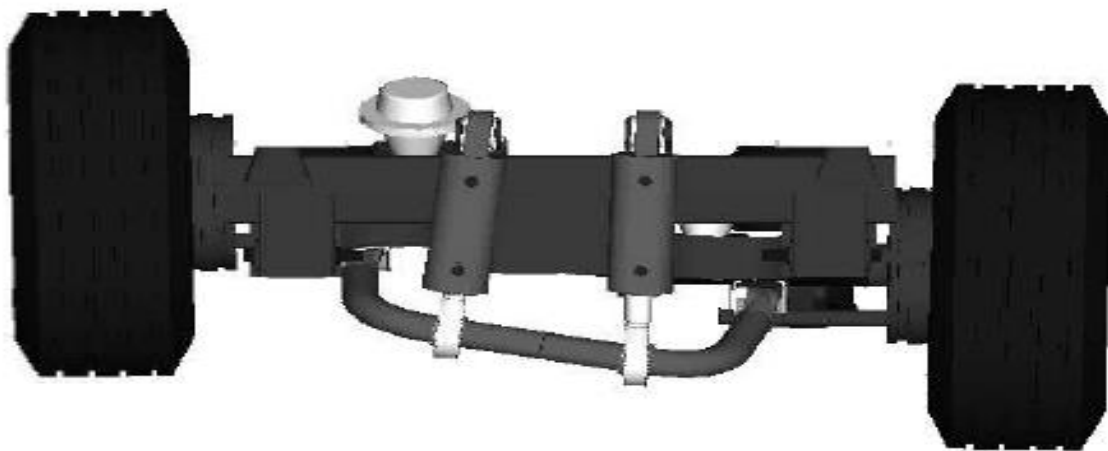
Hydraulic Actuators & ARB Assembly in Active Roll Control System
